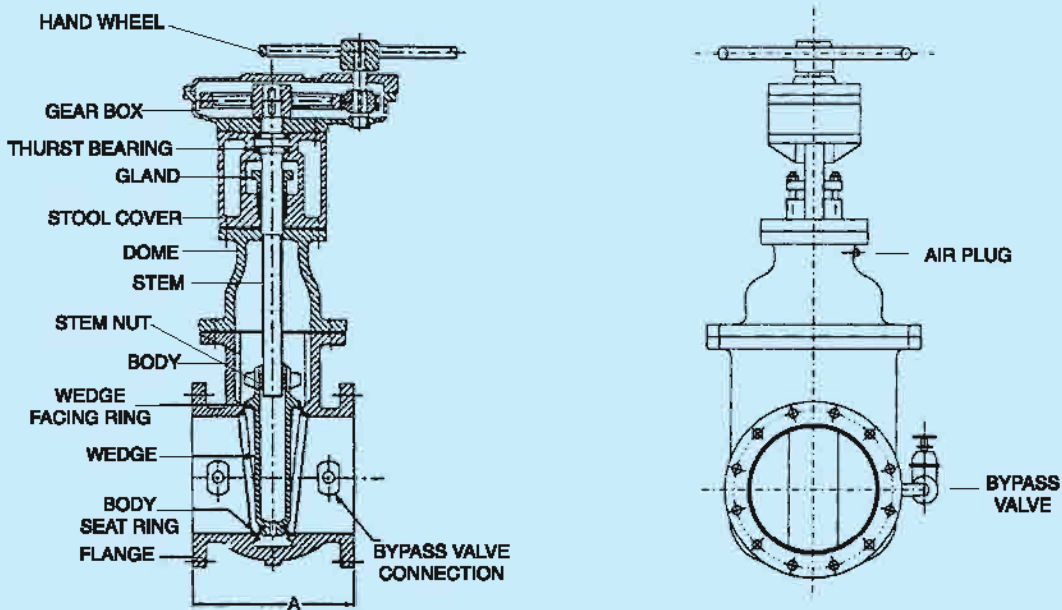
Sluice Valve with Ball Thrust Bearing and Spur Gear arrangement
